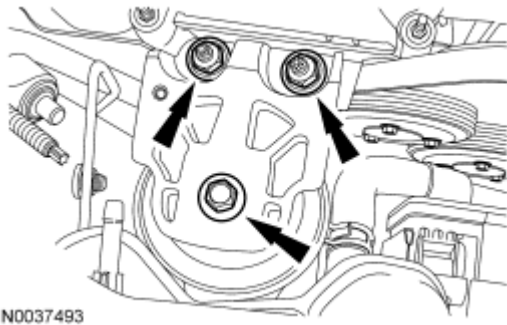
Locating Engine Mount Bracket Bolt And Nuts
